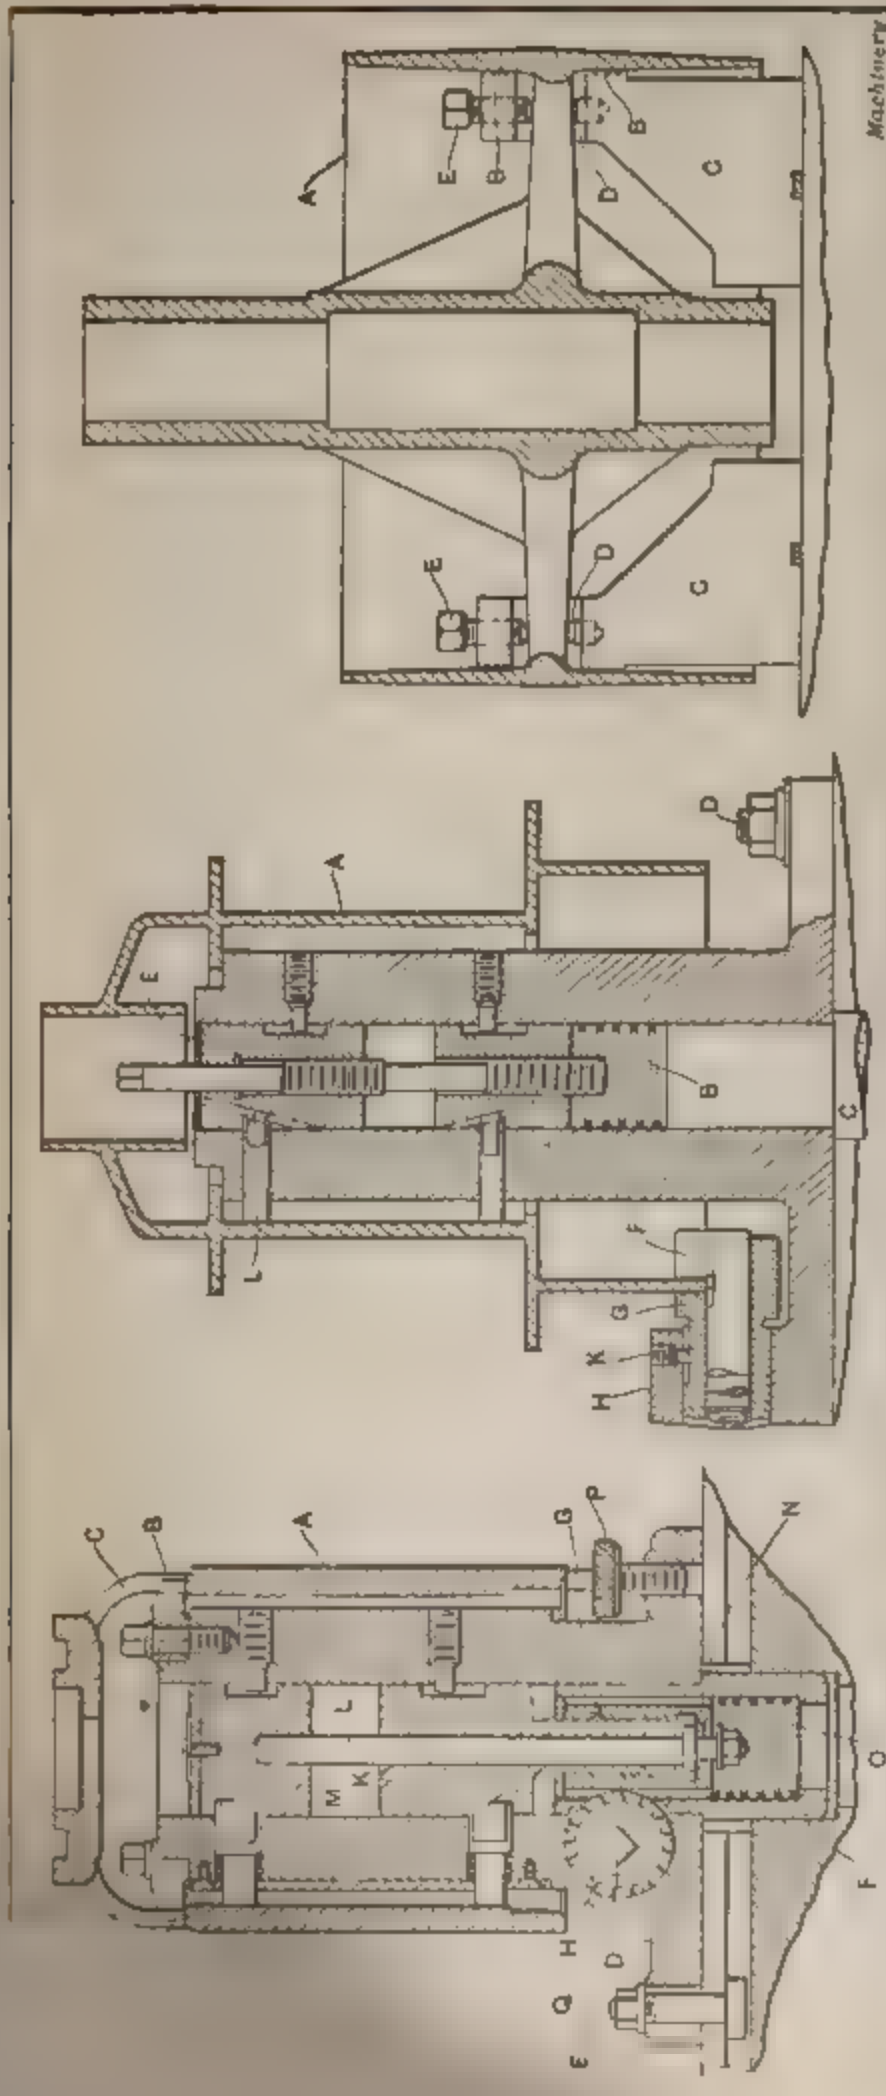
Vertical Boring Mill Fixture for holding Part A internally
